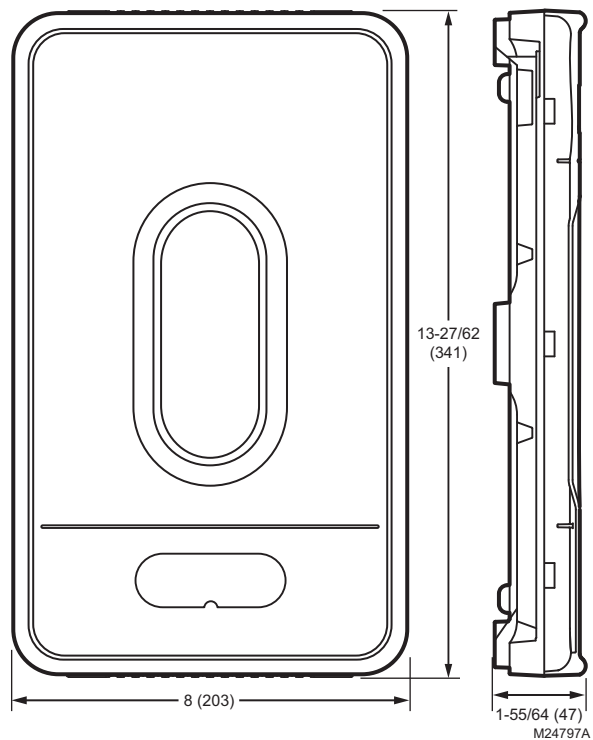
TAZ-4H Zone Panel Dimensions in in. (mm).
